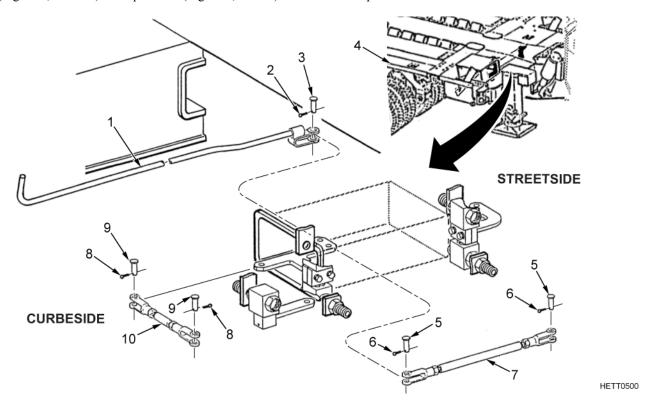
Gooseneck Isolation Valve Assembly Removal.
